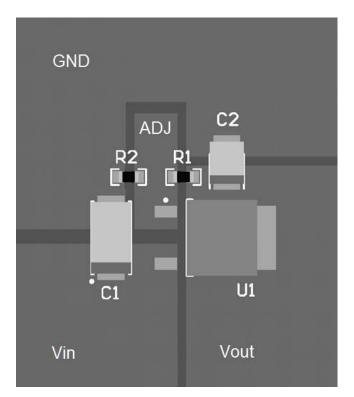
TO-252 Layout Example for LMS8117A Adjustable Version (PCB View)
